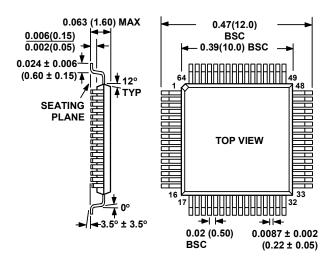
64-Lead LQF Package [LQFP] (ST-64-2)—Dimensions shown in millimetres
